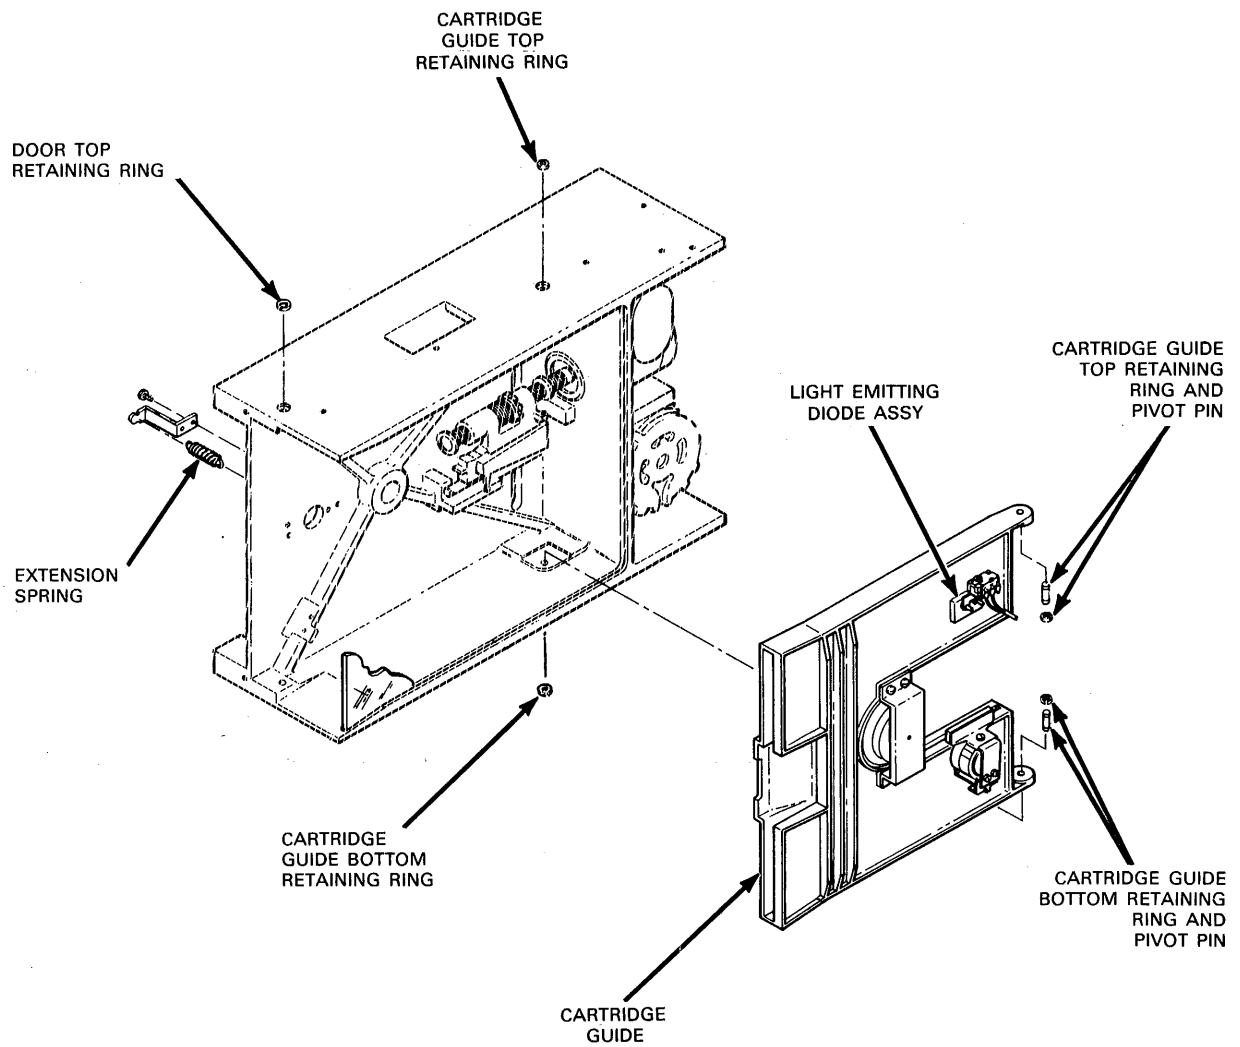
Cartridge Guide Assembly Removal and Replacement
